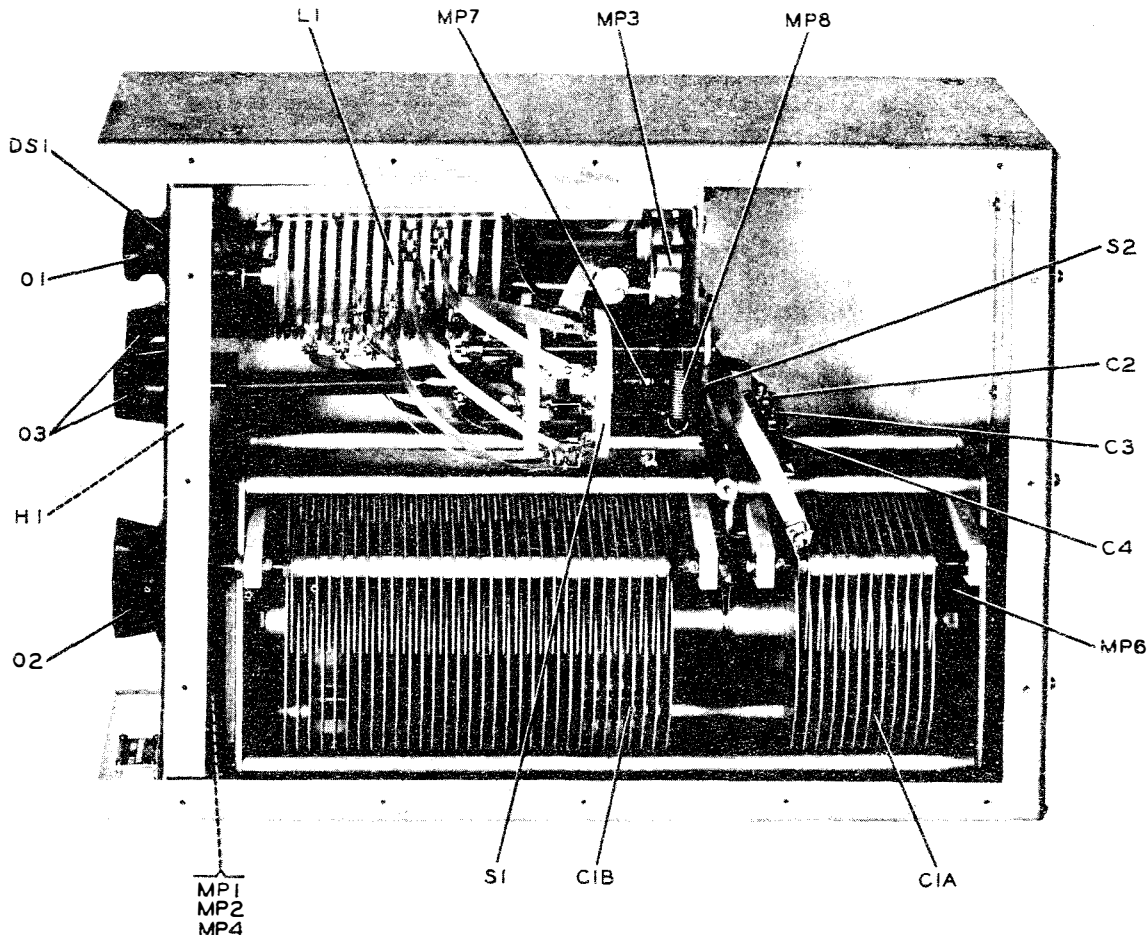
Antenna Coupler 180Y-1, Right Side View, Cover Removed, Parts Location
